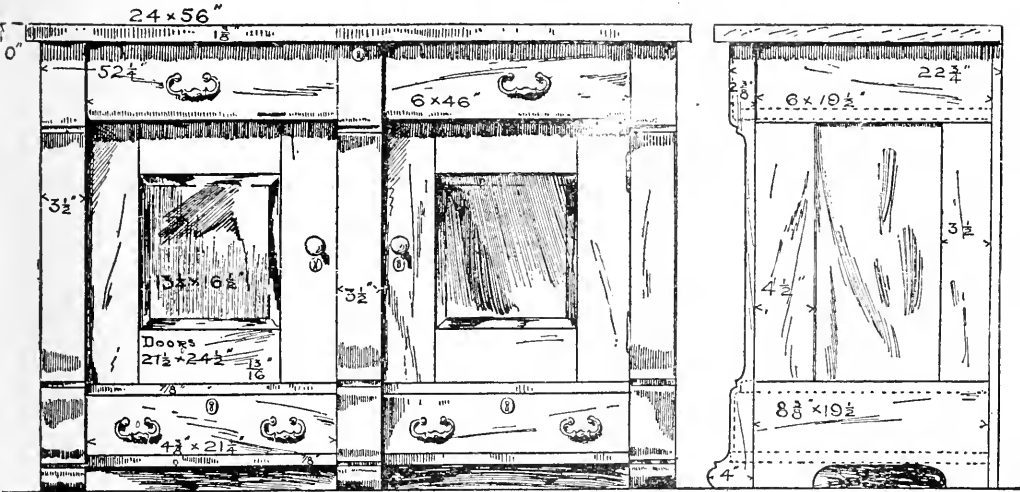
Front and End Elevation of Sideboard, Showing Dimensions of Various Parts.
